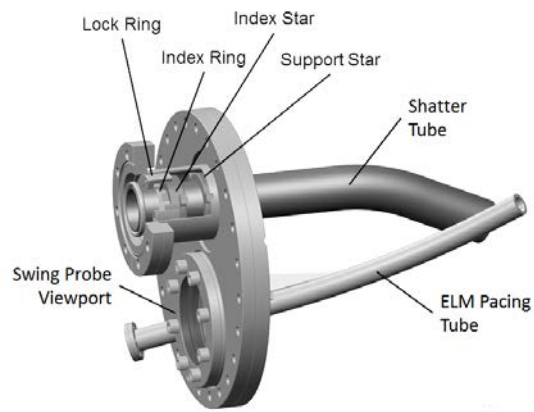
10 inch CF R+1 port flange with components for low field side ELM pellet injection, a swing probe optical viewport, and the rotatable SPI-II shatter tube.
